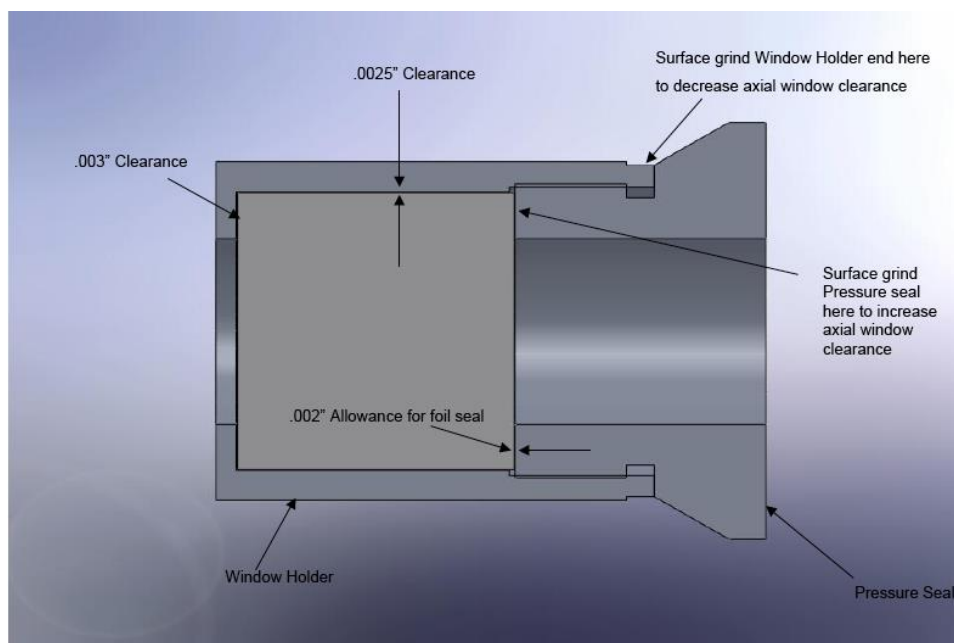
Window holder showing tolerances and machining requirements. A Kapton® film ($T_{\text{melt}} > 300^{\circ}\text{C}$) seals between the window (light gray) and holder body, which makes a metal-to-metal seal with a seat in the viscometer body.
